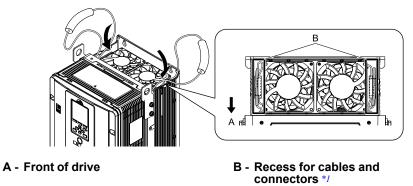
Put the Cables and Connectors in the Drive Recess
